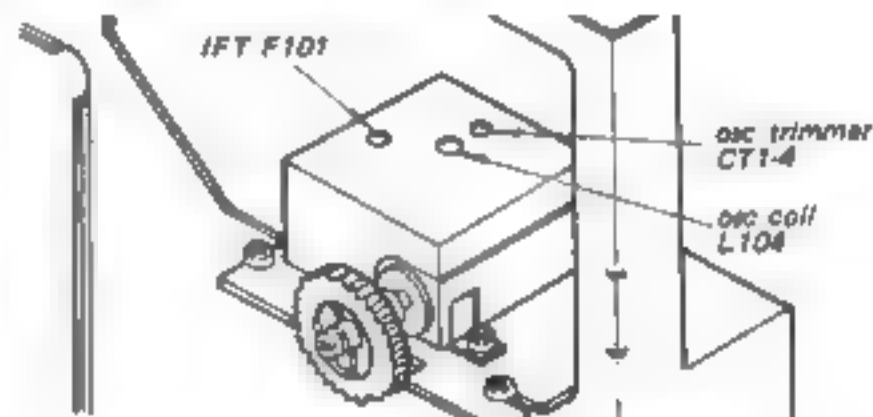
Fm tuner block adjustments on fm tuner block
